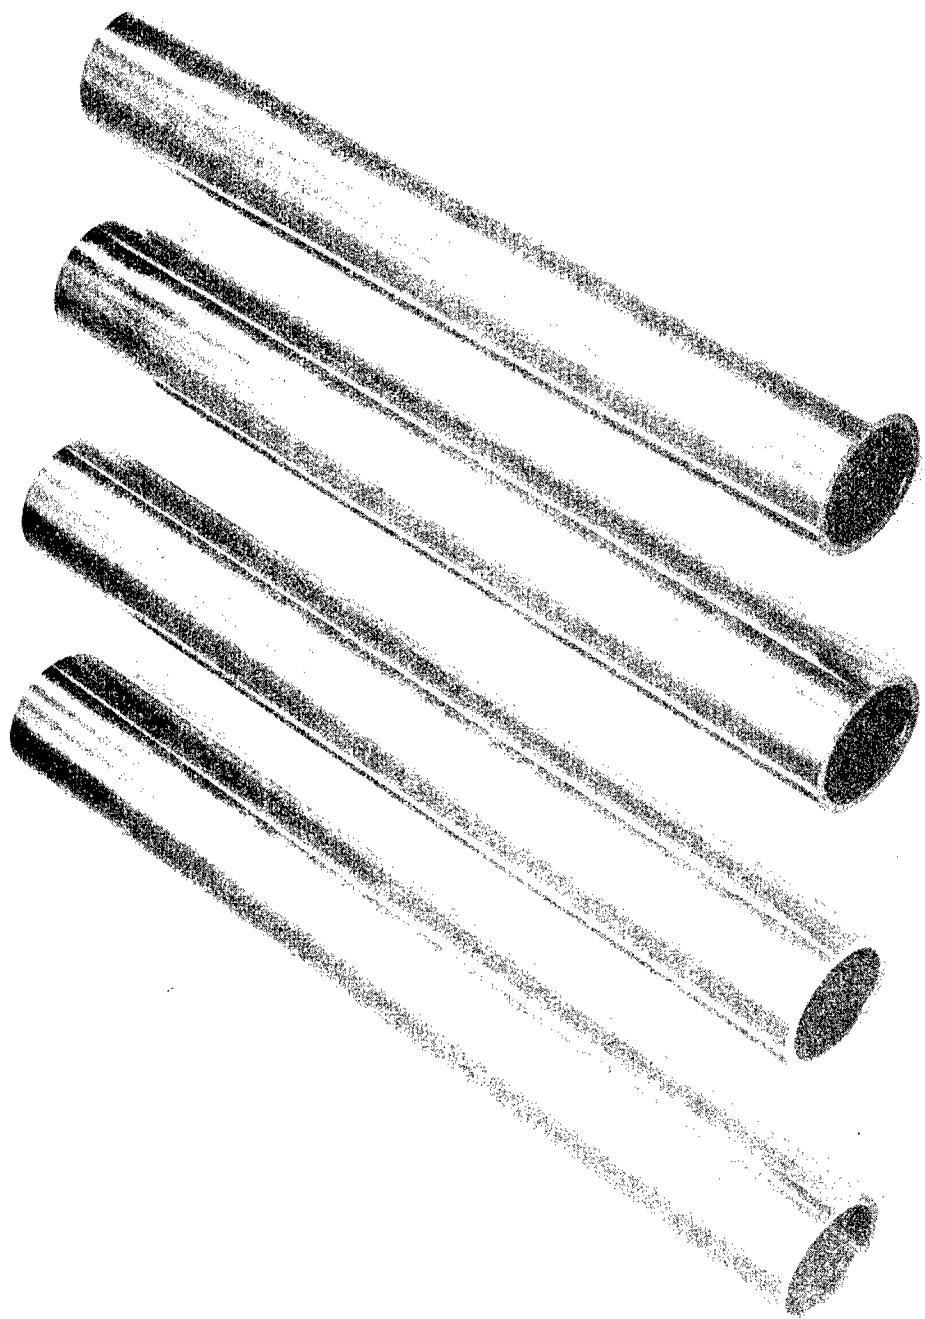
Finish machined tungsten-25 rhenium sleeve extrusion blank.
